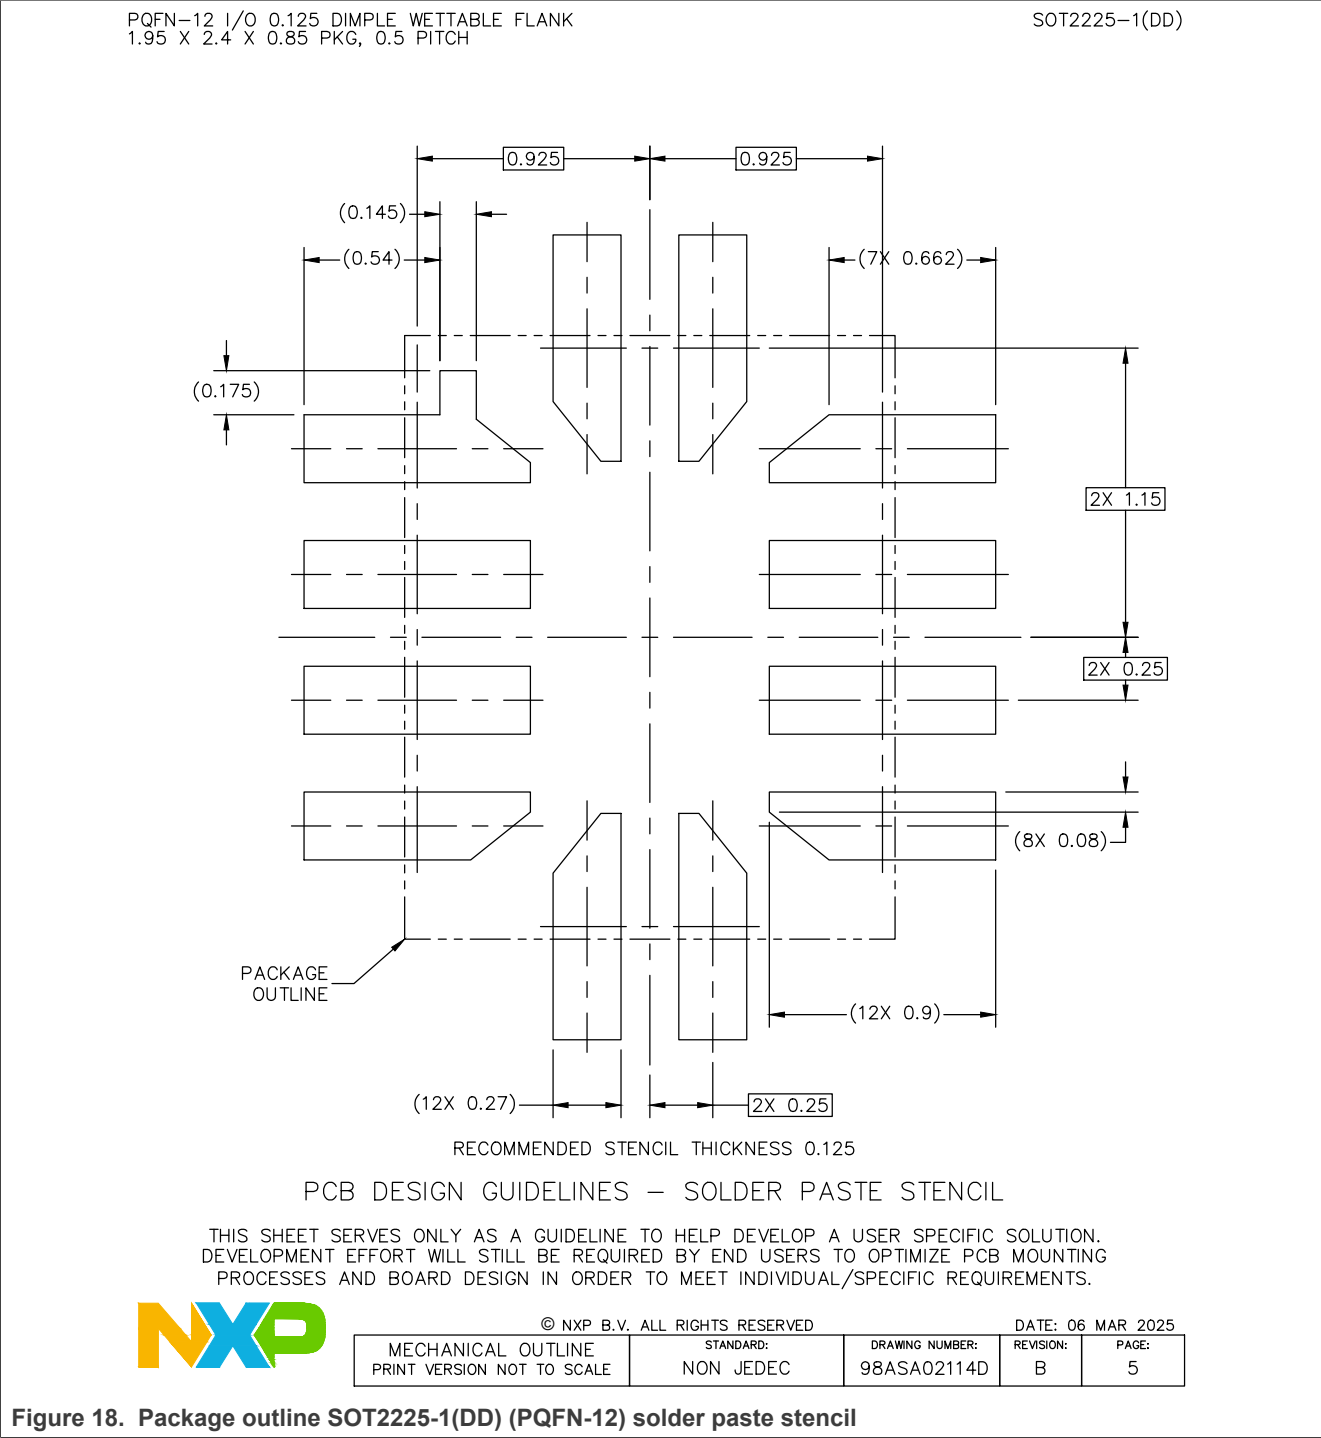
Package outline SOT2225-1(DD) (PQFN-12) solder paste stencil
